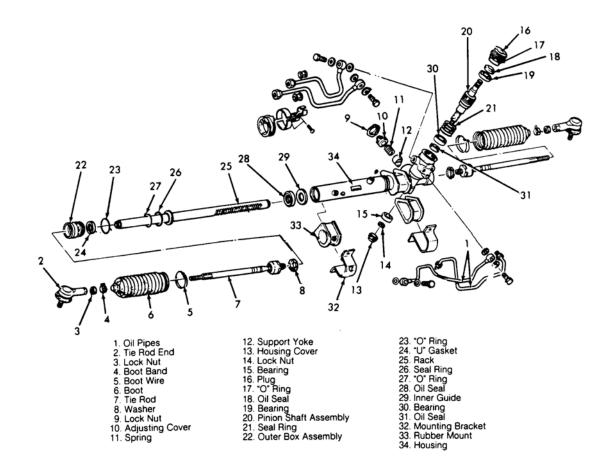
Exploded View of Rack & Pinion Steering Gear (Protege & 323) Courtesy of MAZDA MOTORS CORP.
